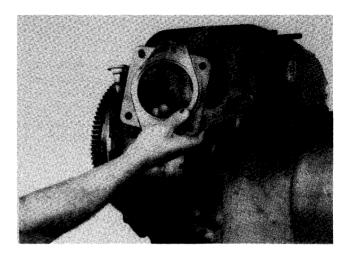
Remove pump adaptor bolts, adaptor and gasket.
